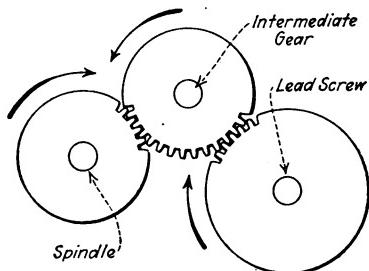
How the gears are arranged on the lathe for screw-cutting
